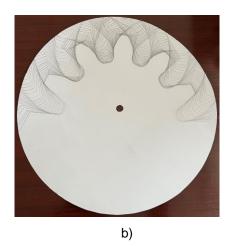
Educational equipment for simulation of involute gear shaping, based on MAAG method (a) and part of the gear model drawn on this equipment (b)
